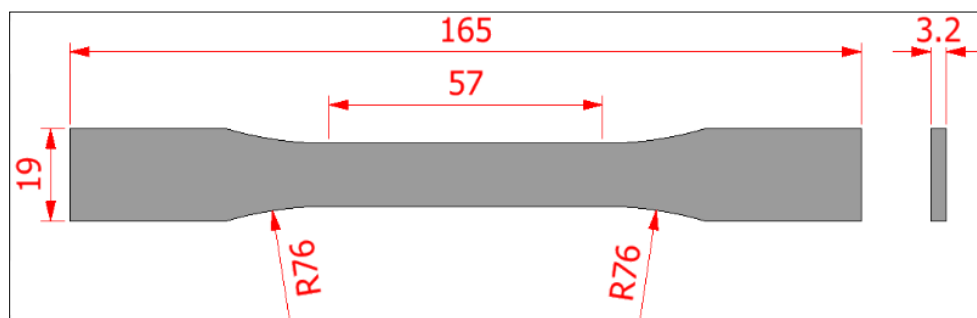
Technical drawing of tensile sample in accordance with ASTM D638-22 (2022) Type-1 standard (mm)
